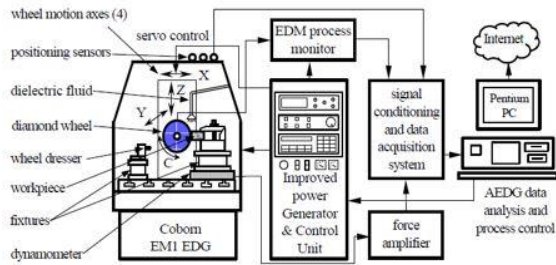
Experimental set-up for electrical discharge abrasive grinding [8]
